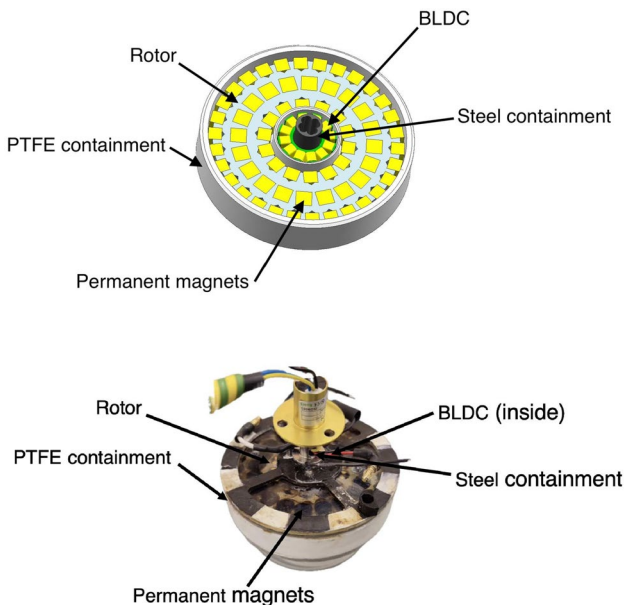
Design of the Ferrowheel. Above the CAD of the system without cover, below the flight-ready Ferrowheel prototype with viewing windows
